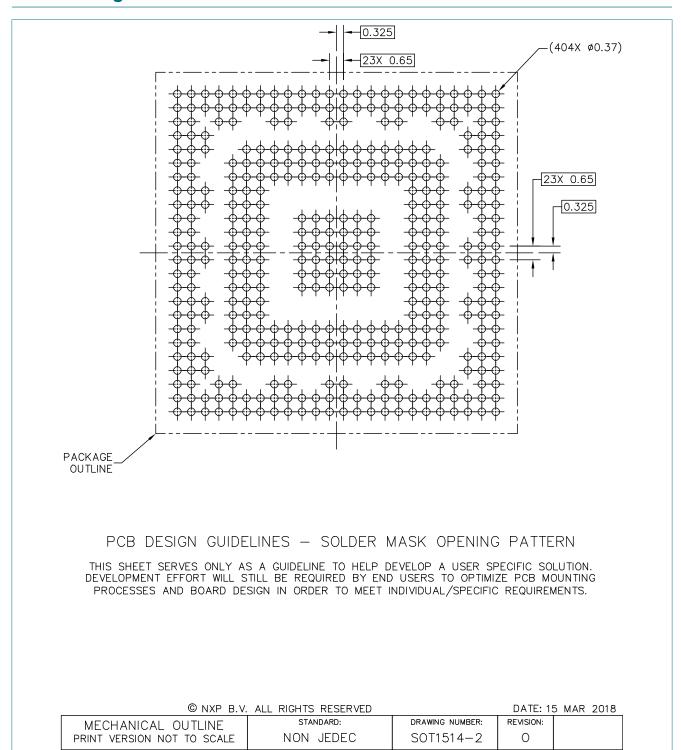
Reflow soldering footprint for LFBGA404 (SOT1514-2)
